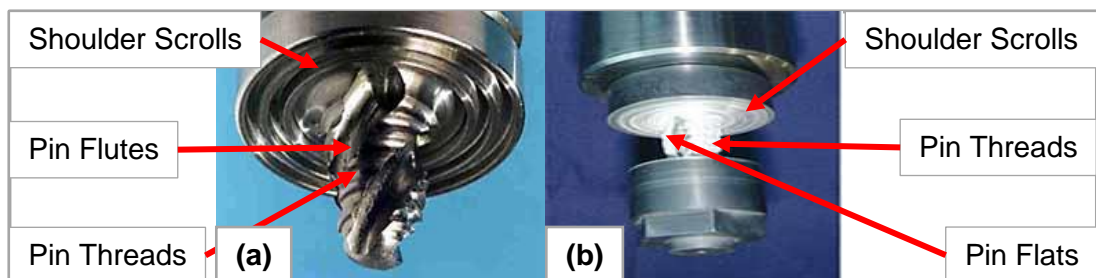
a) The TWI Tri-flute MX Tool and b) Floating Bobbin Tool [29, 30]
